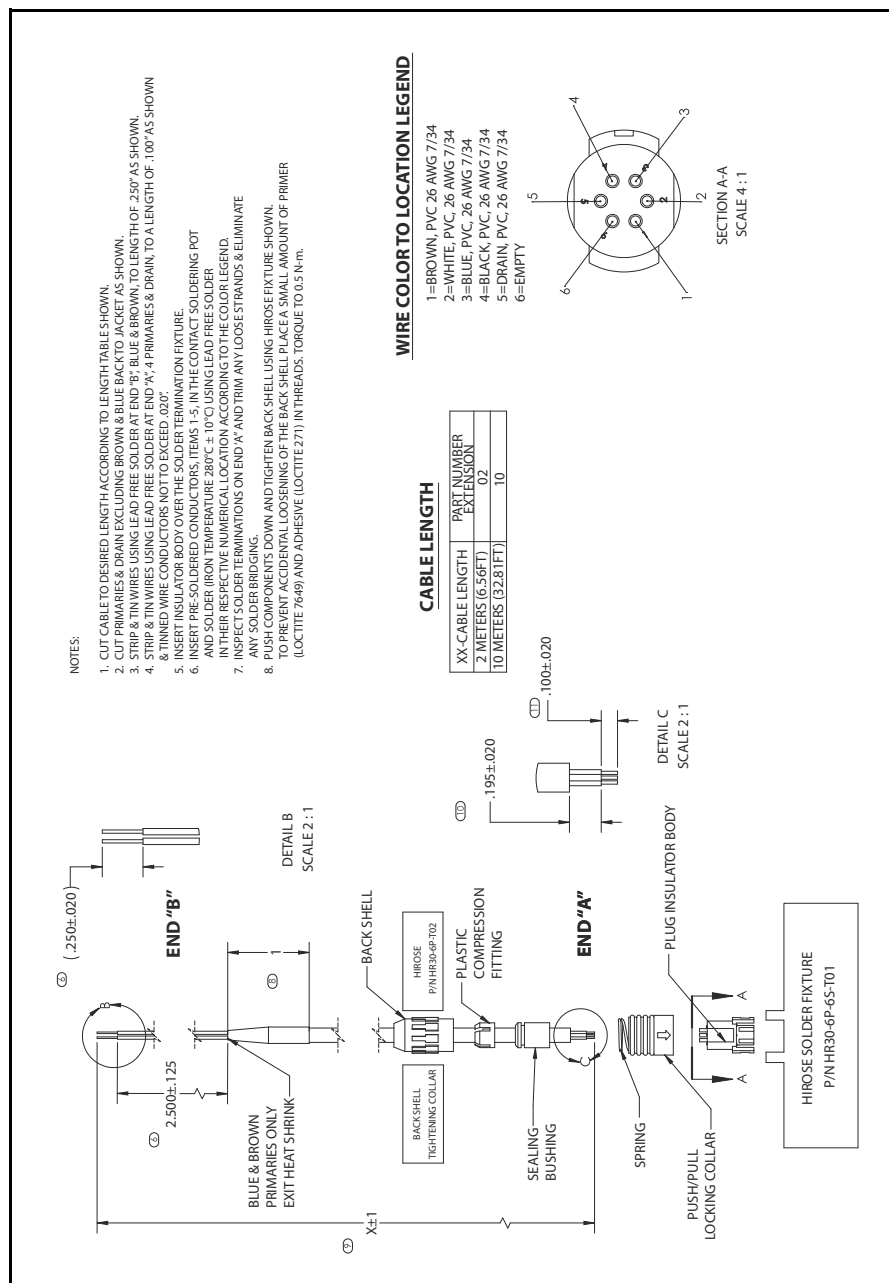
Cable, Standard (ref. dwg. 704-1317, SH 2 of 2)
